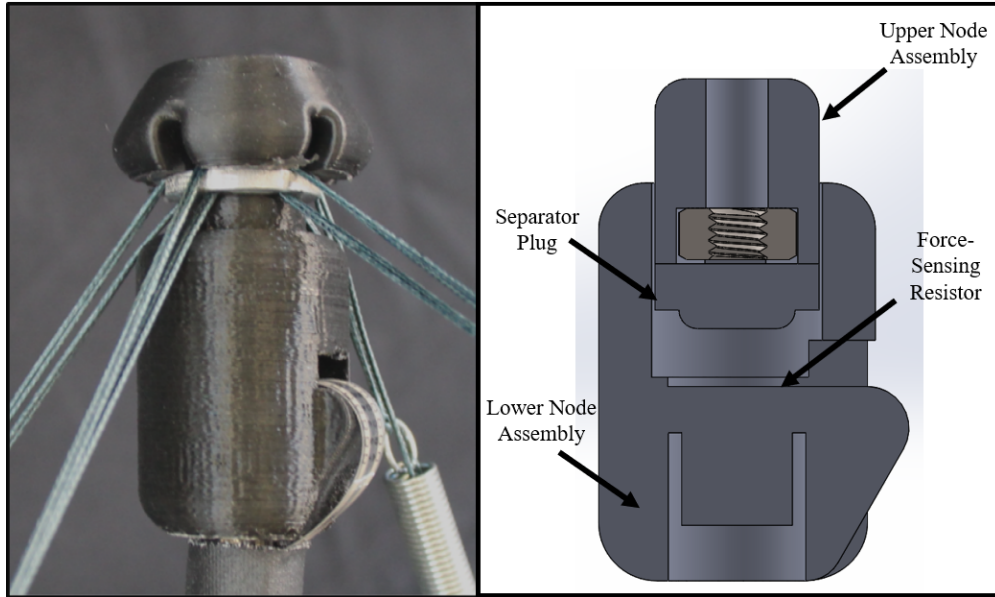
FSR integration in node of structure (second iteration). The left image shows the fully constructed node assembly with integrated FSR. On the right is a cross-section view of the node assembly CAD model showing new FSR enclosure.
